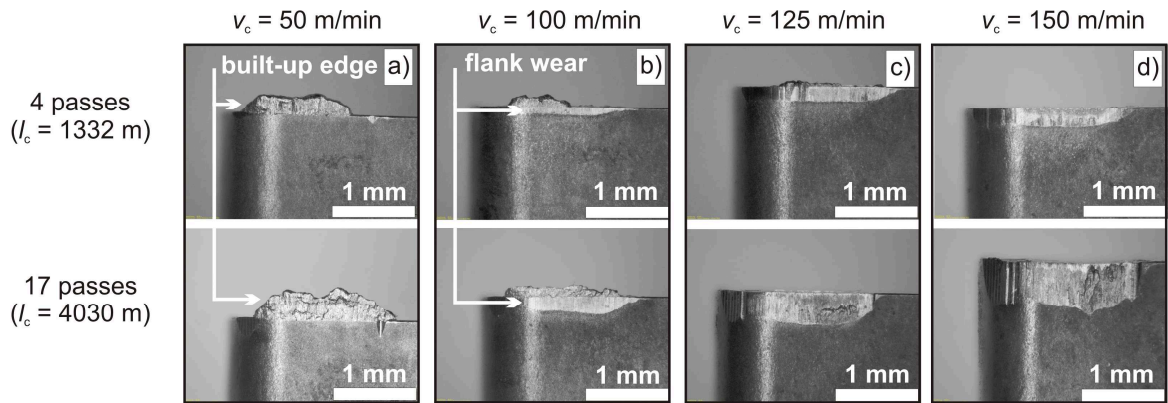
Overview of flank faces (the adhering built-up edges and the flank wear are indicated) of cutting tools used in the dry metal cutting process. For the eight different tool wear states for four different cutting speeds  $v_c$  in the built-up edge formation regime (a):  $v_c = 50$  m/min; b):  $v_c = 100$  m/min; c):  $v_c = 125$  m/min; d):  $v_c = 150$  m/min) the resulting residual stress depth profiles for the corresponding machined workpieces are determined.
